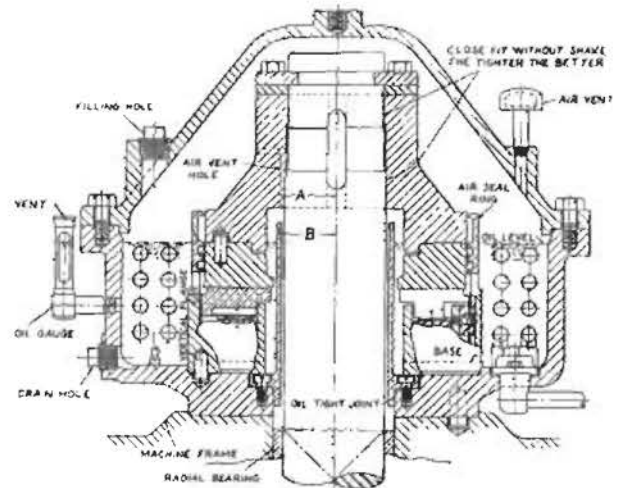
Simple vertical mounting with cooling coil and air seal ring. Thrust bearing may be Style LV or KV. STANDARDIZED.
